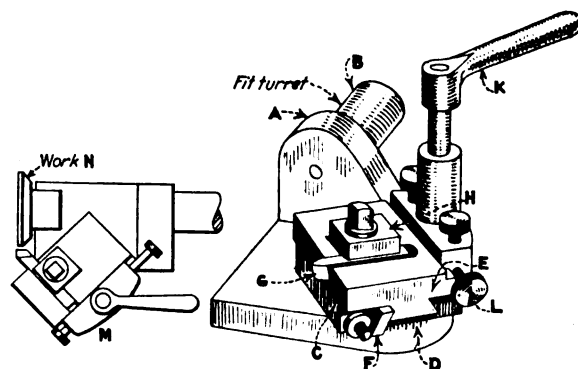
ADJUSTABLE TAPER-TURNING TOOL
